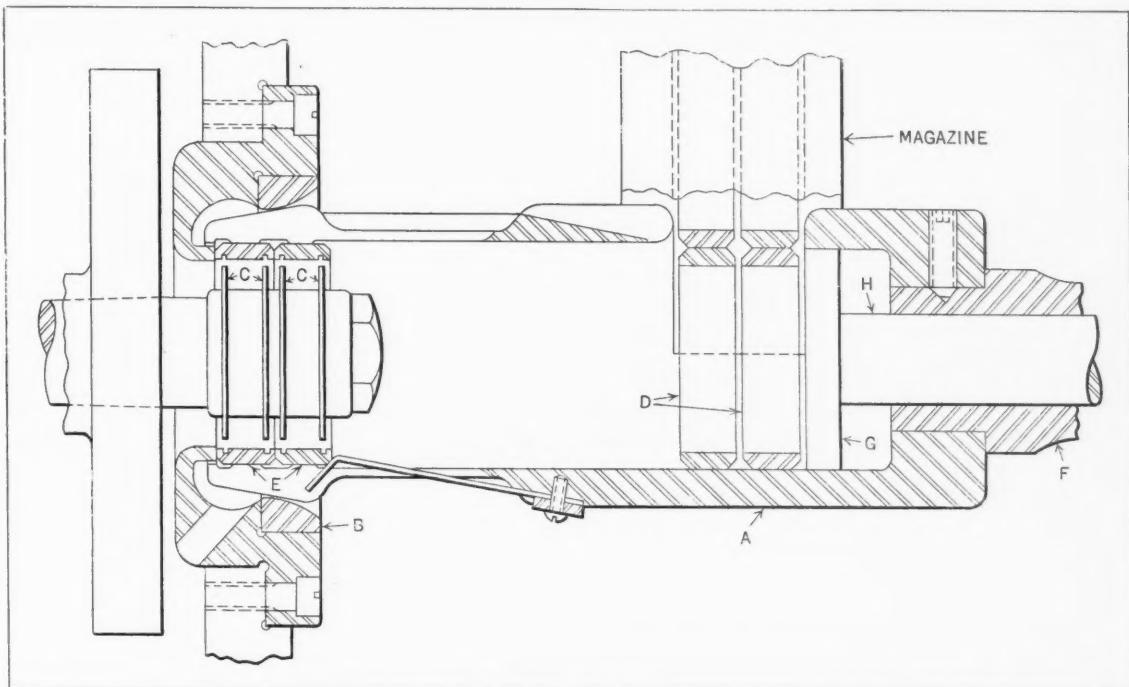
Transfer Mechanism on Magazine Attachment Shown in Fig. 1
